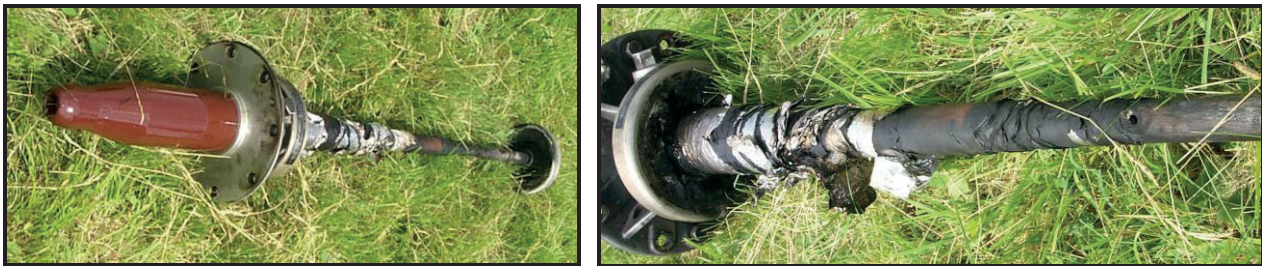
Disassembled failed bushing; Figure left – the whole bushing; Figure right – upper part of the bushing (the hole on the right-hand side of the tube was caused by the electric arch)
